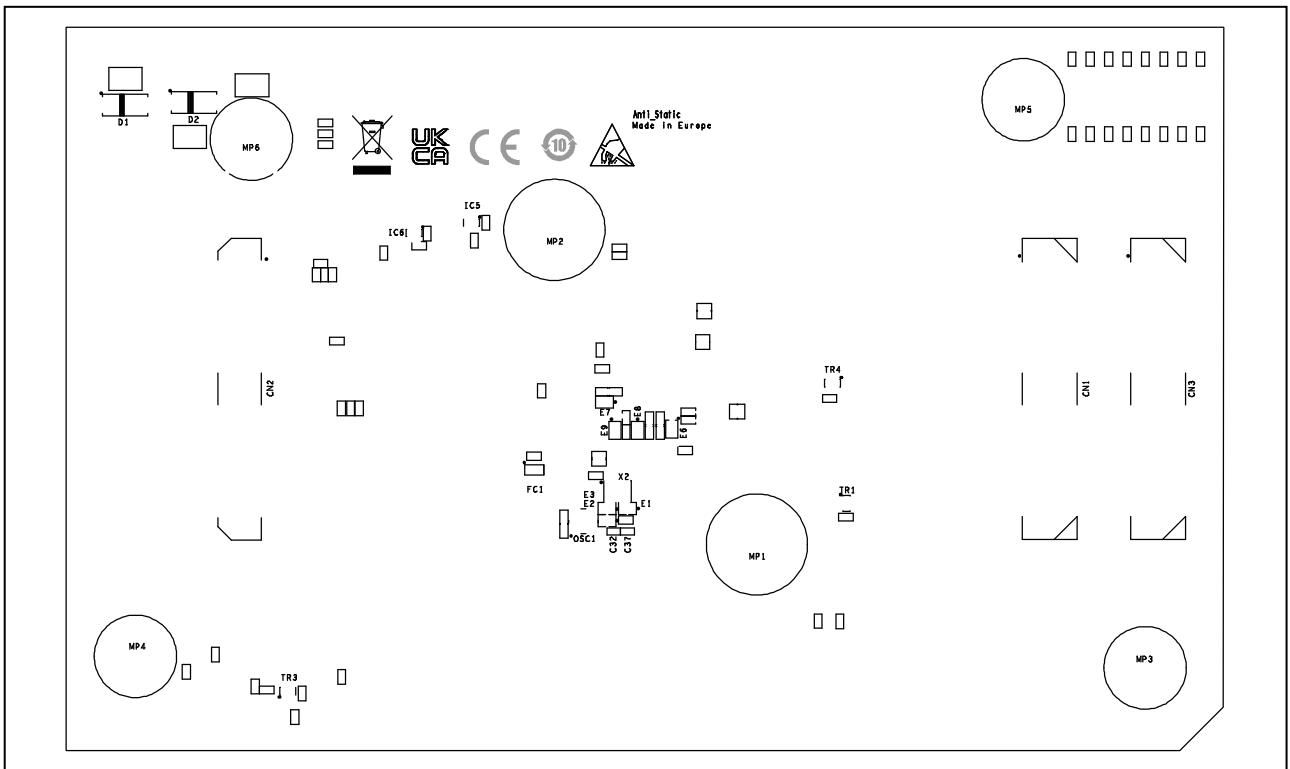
Placement of connectors on bottom side of board version D020647_06_V01
